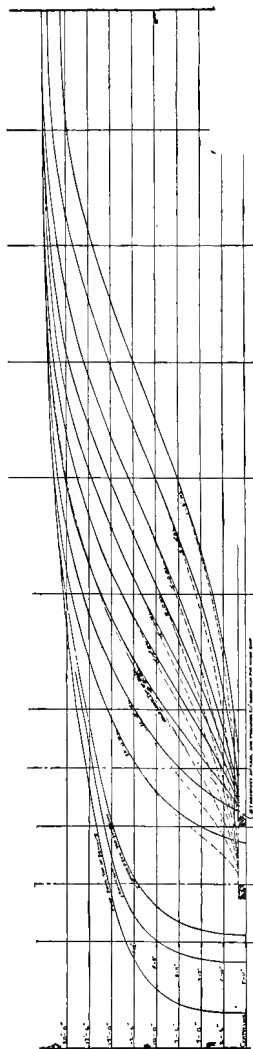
Standard Wooden Steamship—Half-breadth Plan—Moulded Lines—Stern.
